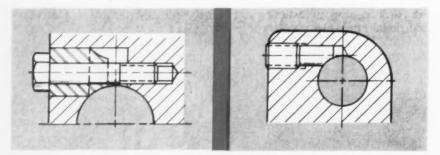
The contact surface of this clamp was turned smoothly with a forming tool.
